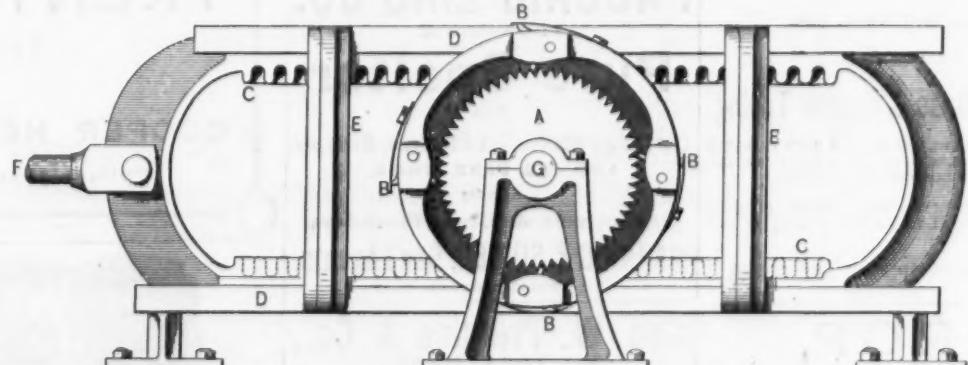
Enlarged View of Rack and Dog Disks, Transmitting Power to the Shaft.
